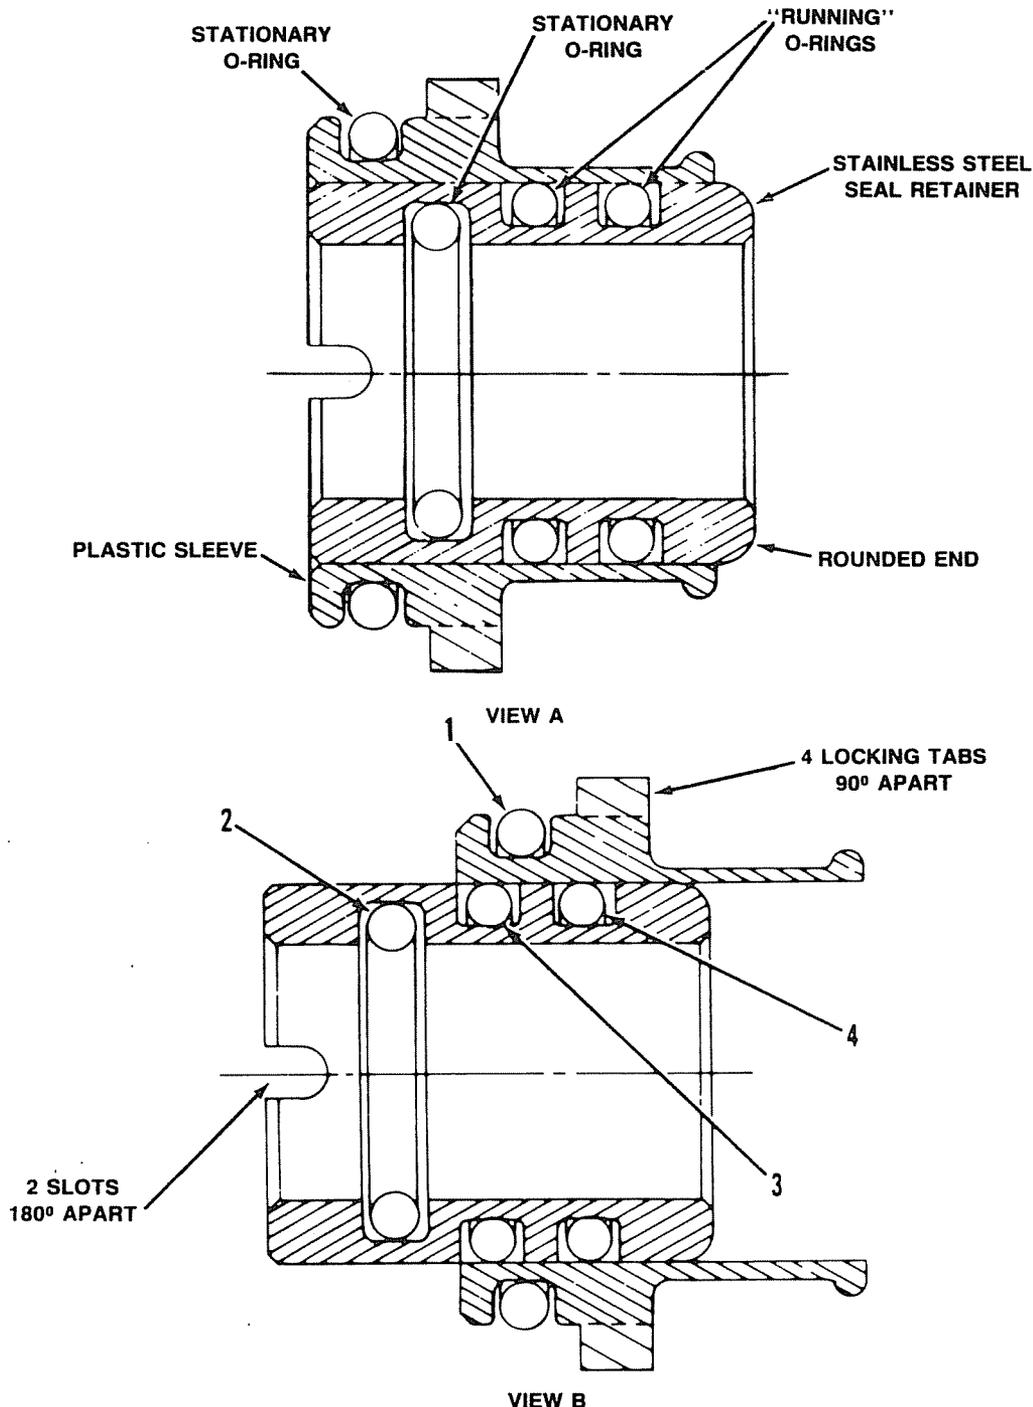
INSTALLING SHAFT SEAL ASSEMBLY IN FREEZE CYLINDER
